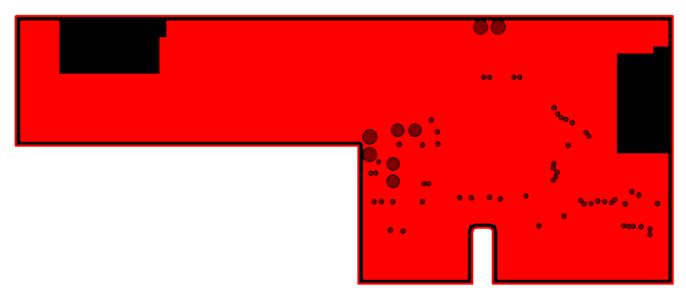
WL1837MODCOM8I Layer 2 Layout
